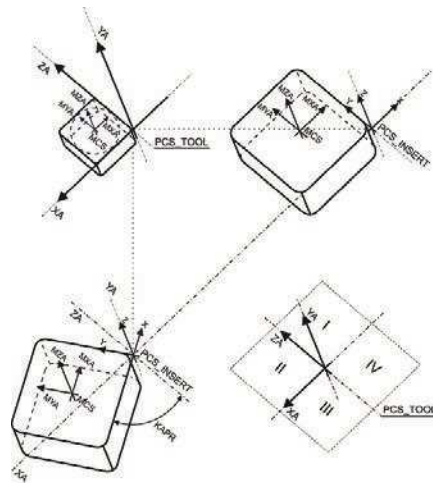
Orientation of PCS_INSERT, MCS_INSERT and PCS_TOOL on end cutting edge angle
